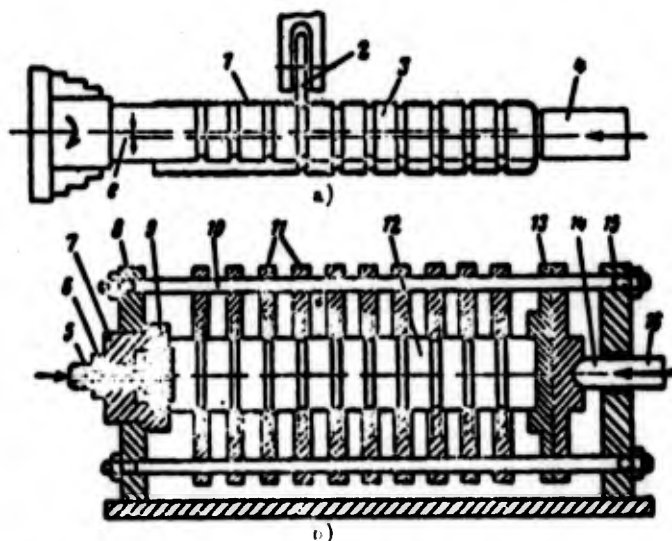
Forming of corrugations of bellows: a) preliminary rolling; b) forming of corrugations; 1 - billet; 2 - roller; 3 - mandrel; 4 - clamp; 5 - pipe connection of liquid feed; 6 - nut; 7 - bushing; 8, 15 - braces; 9 - grip; 10 - plunger; 11 - molding disks; 12 - billet of the bellows; 13 - shoe; 14 - rod; 16 - hydraulic drive.
